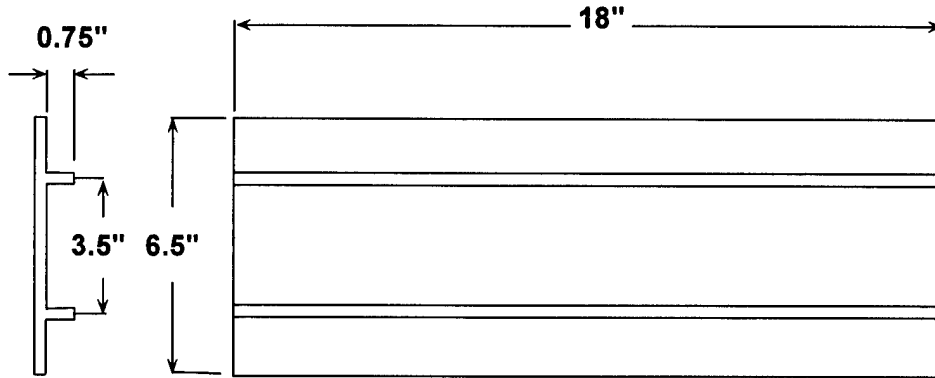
THE GEOMETRICAL DETAILS OF THE TWO-BLADED STIFFENED PANELS
